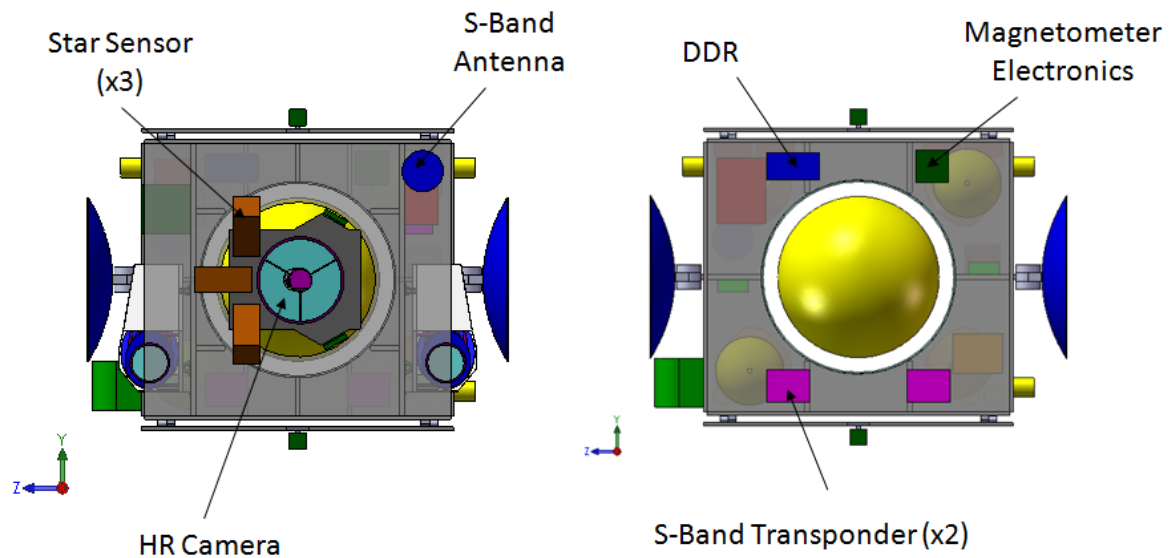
PM Top Panel & PM Lower Panel side views of GSST satellite, showing equipment layout for OPC3-1.
